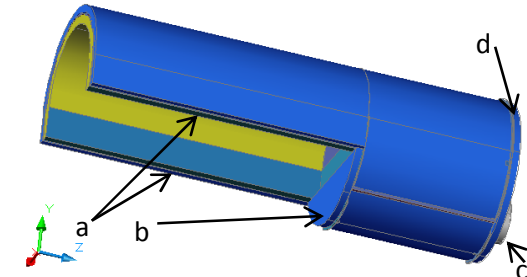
3D model of the 5' long pediatric sound attenuating hood. a. edge for patient table seal; b. circular segment seal for front end of patient table; c. opening for the hose to a duct fan; d. noise blocking end board.
